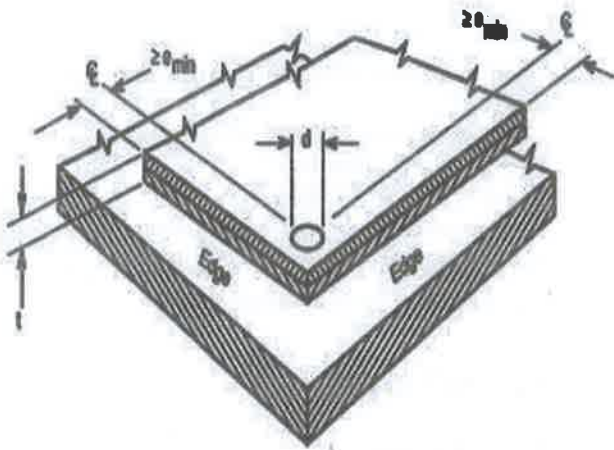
Edge Distance for Arc Spot Welds – Double Sheet
